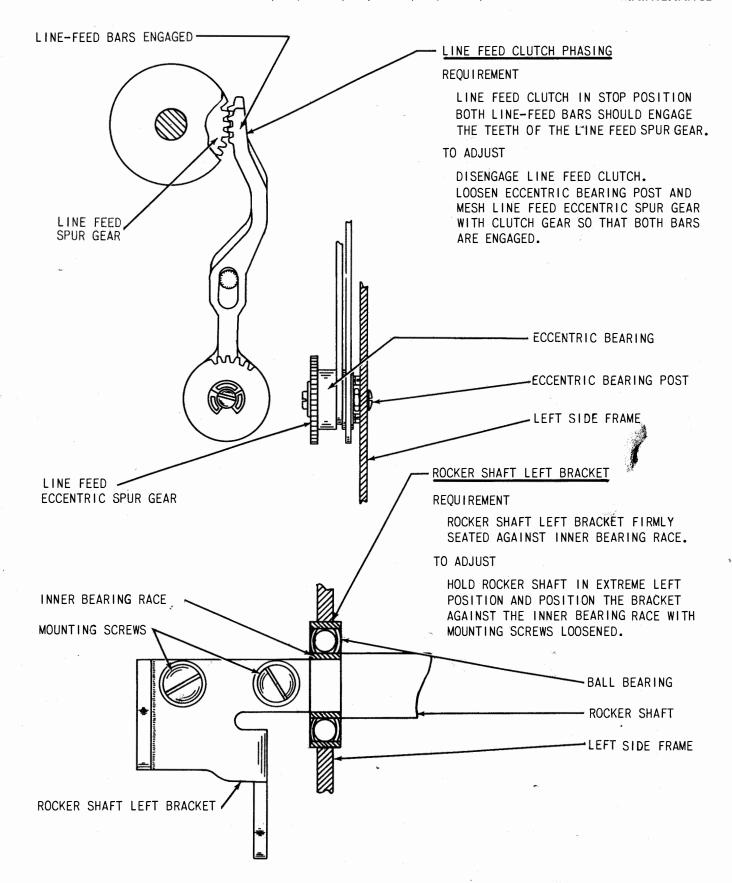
Automatic Typer, Line Feed and Rocker Shaft Mechanisms
